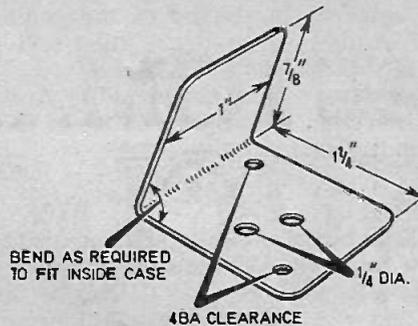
The heat sink used for TR4. The emitter and base pins must not touch the heat sink, which is bent to hold the board firmly inside the case.
